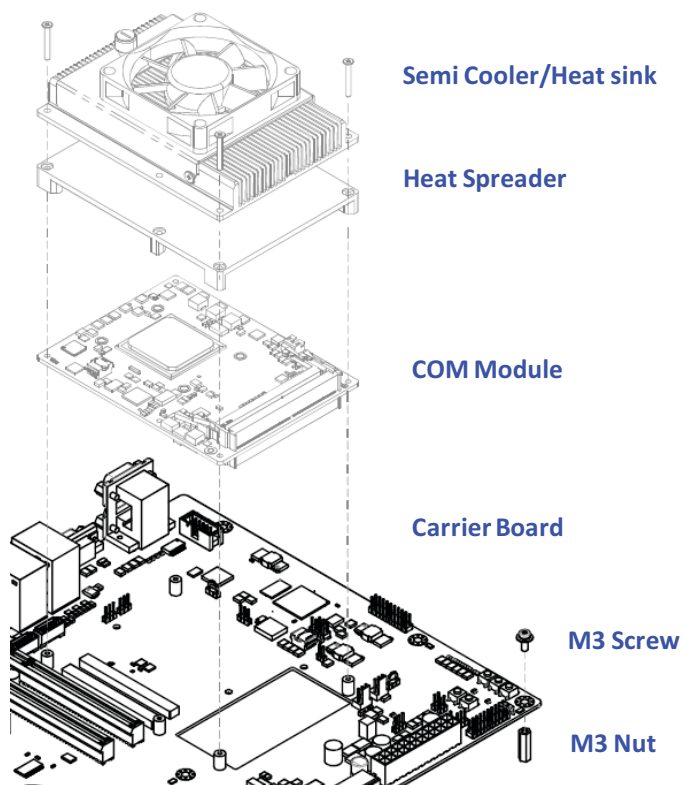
Assembly Drawing - COM Express to SOM-DB5920
